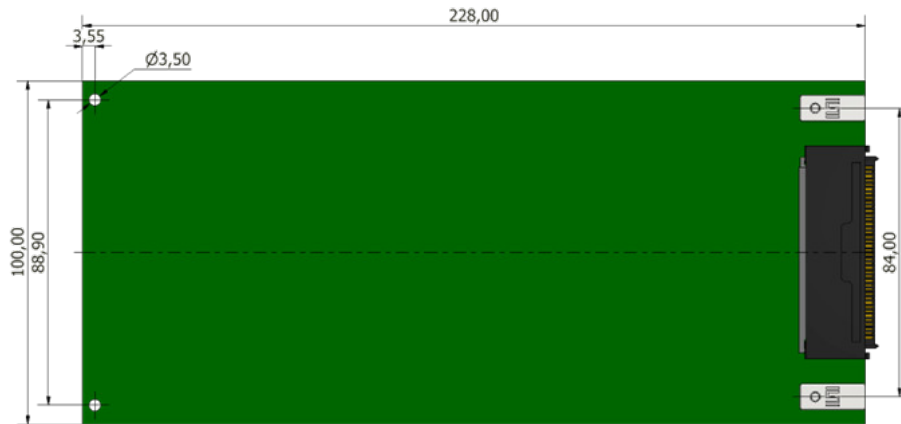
Basic test card dimensions [40]. All dimensions are given in millimeters.
